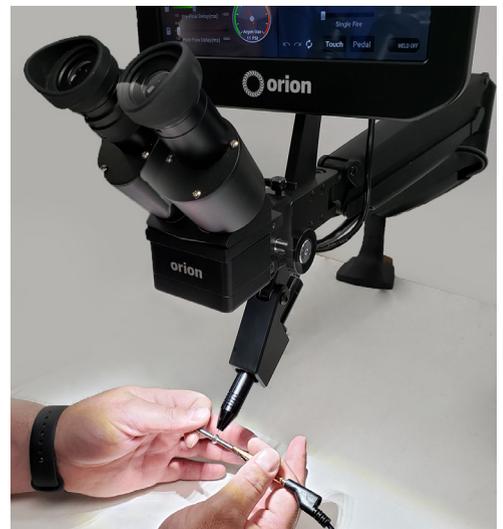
Adjust the arm to a comfortable height. Ideally your hands will be able to rest on the table while making welds for greatest stability.
